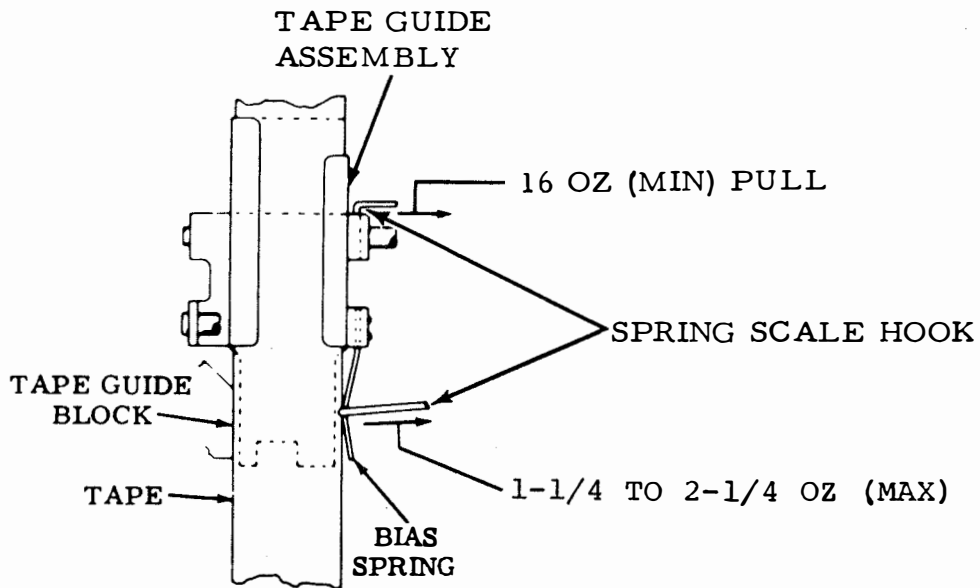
Tape Guide Assembly Spring and Bias Spring (Tape Chute) (For Fully Perforated Tape), Top View
